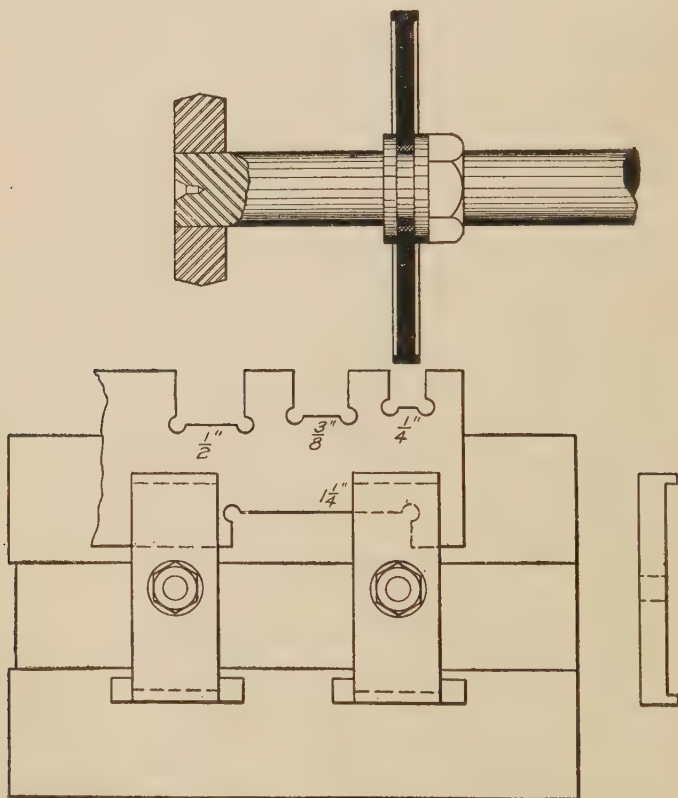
Method of Fastening Gage for Grinding with Thin Wheels
